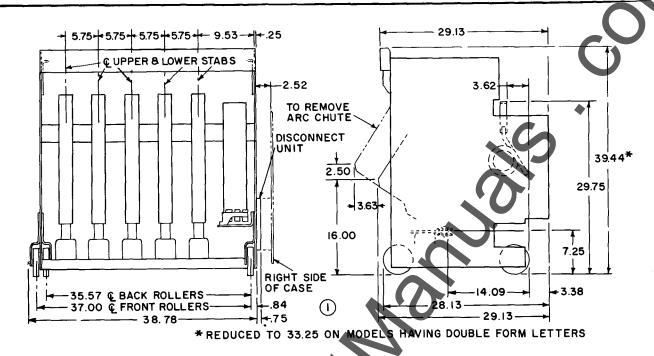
Dimensions, in inches, of IC2814-F111 high-voltage contactor
